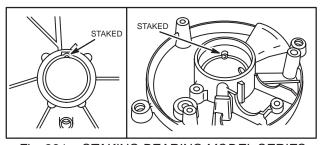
STAKING BEARING MODEL SERIES 140000, 190000, 220000, 250000 CYLINDER OR CRANKCASE COVER
